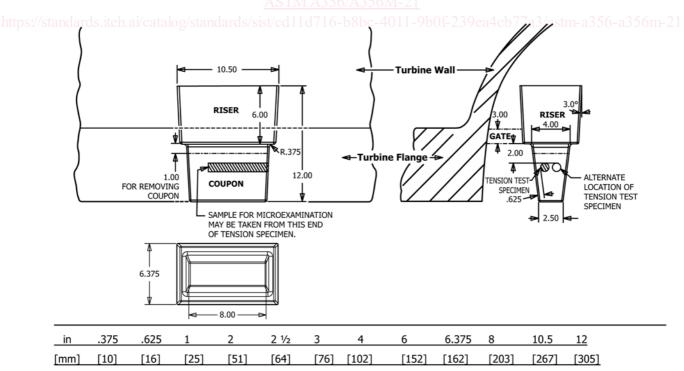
Dimensions and Location of Test Coupons for Turbine Castings
